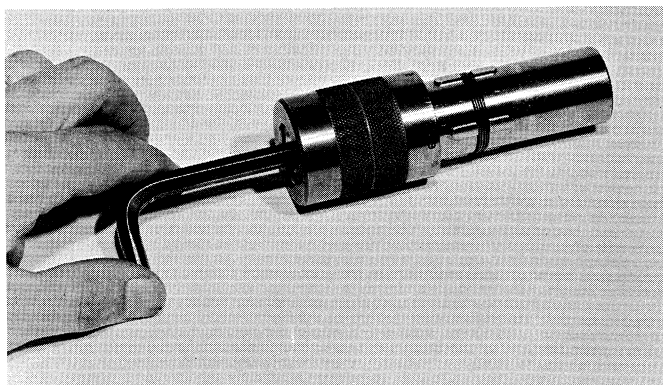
Red Ring Master expanding arbor for inspection operations.
